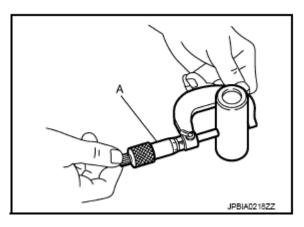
Measuring Outer Diameter Of Piston Pin Using Micrometer Courtesy of NISSAN NORTH AMERICA, INC.
